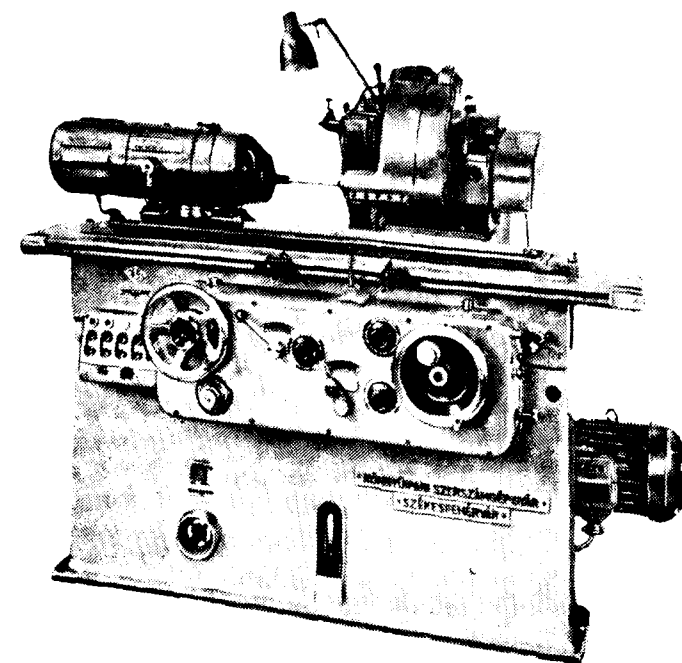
Universal Cylindrical Grinding Machine KU-250
